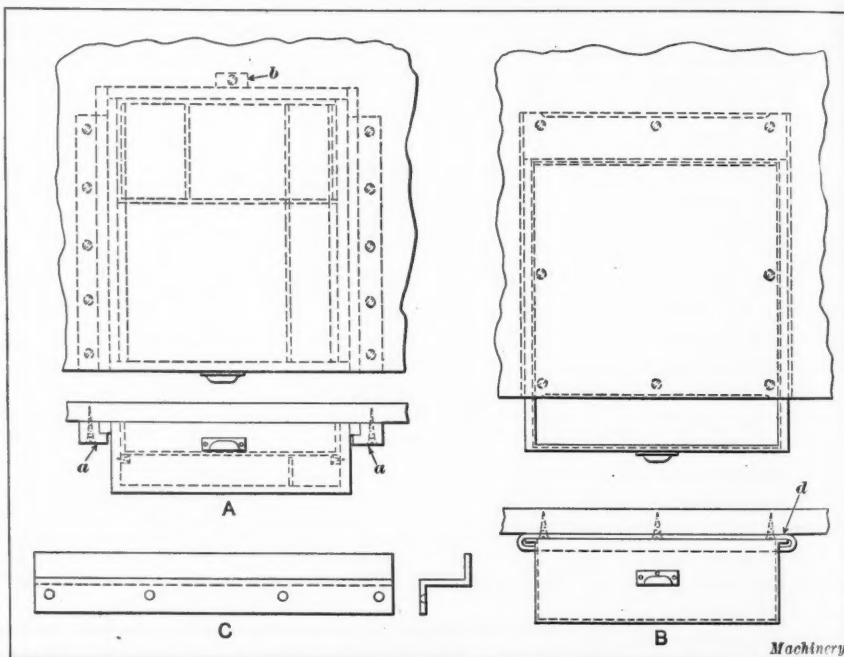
(A) Wooden Type of Drawer. (B) Sheet-metal Drawer. (C) Steel Drawer Slide for replacing Wooden Strips
